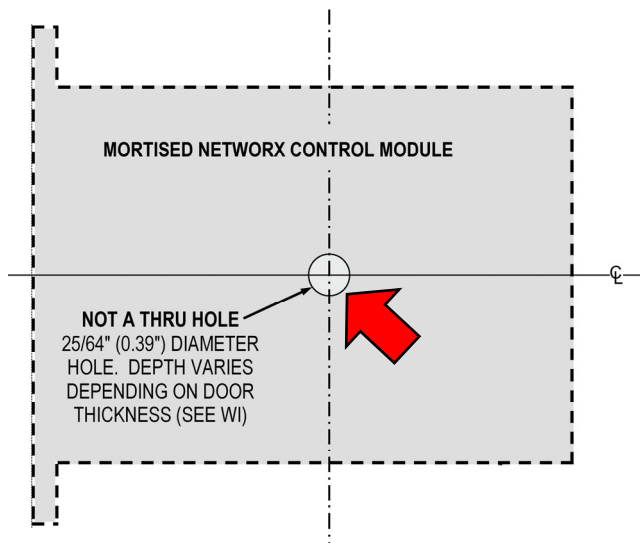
DRILL 25/64" DIAMETER HOLE FOR OPTICAL LIGHT PIPE
